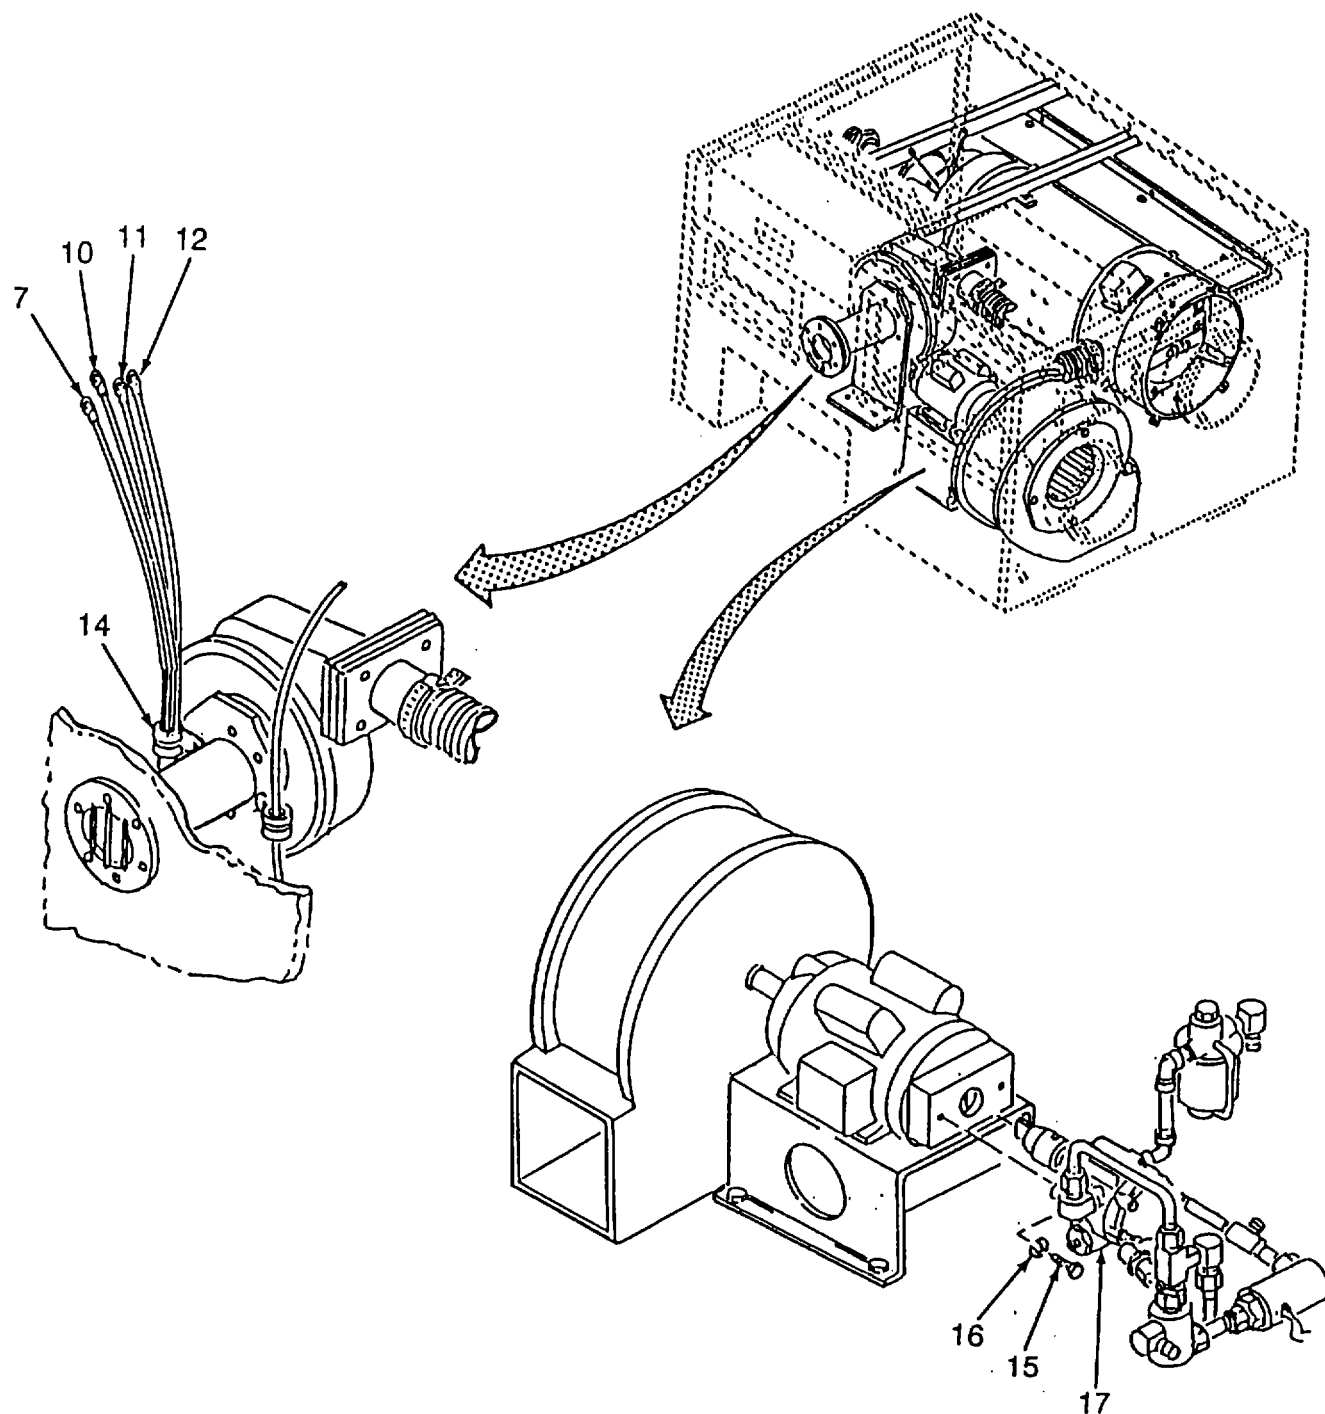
Fuel Pump and Solenoid Valve Removal (Sheet 2 of 2)
